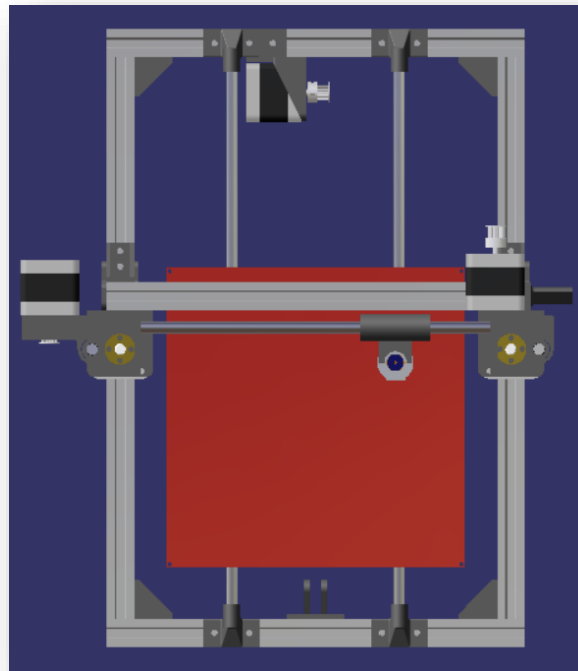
Top view of a Two – Axis Computer Numerical Controlled Foam Cutting Machine
